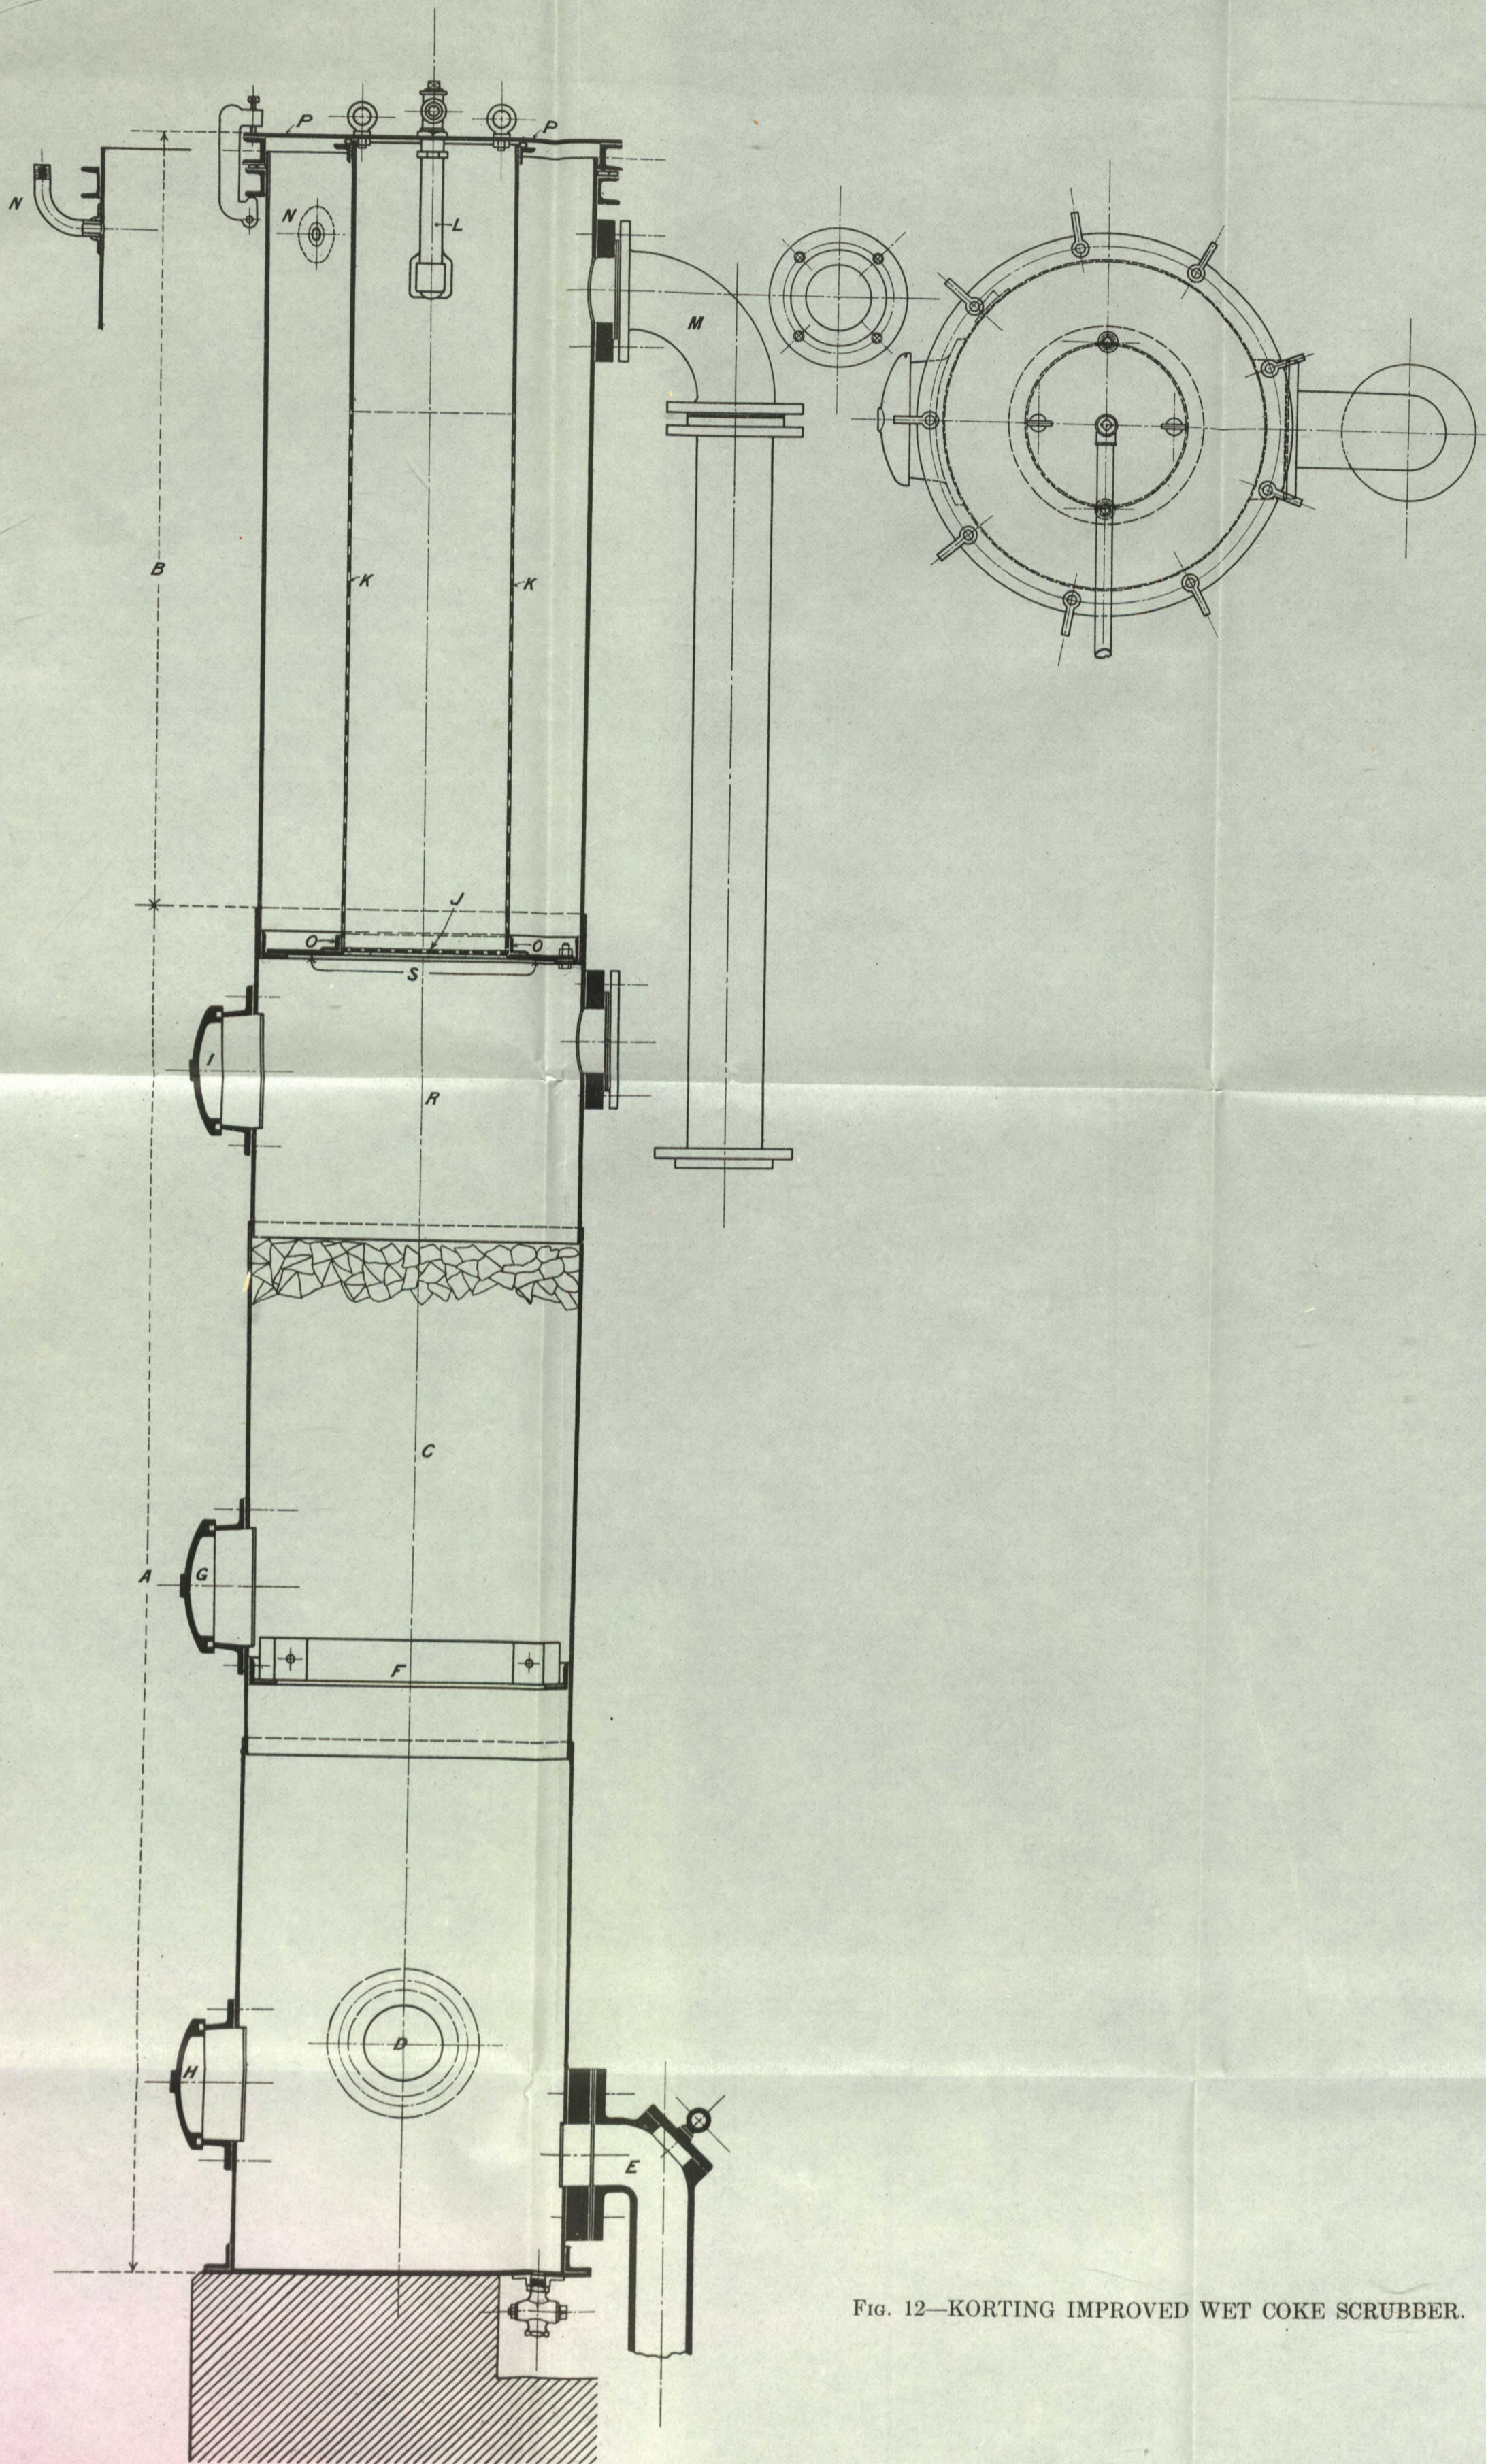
KORTING IMPROVED WET COKE SCRUBBER.
